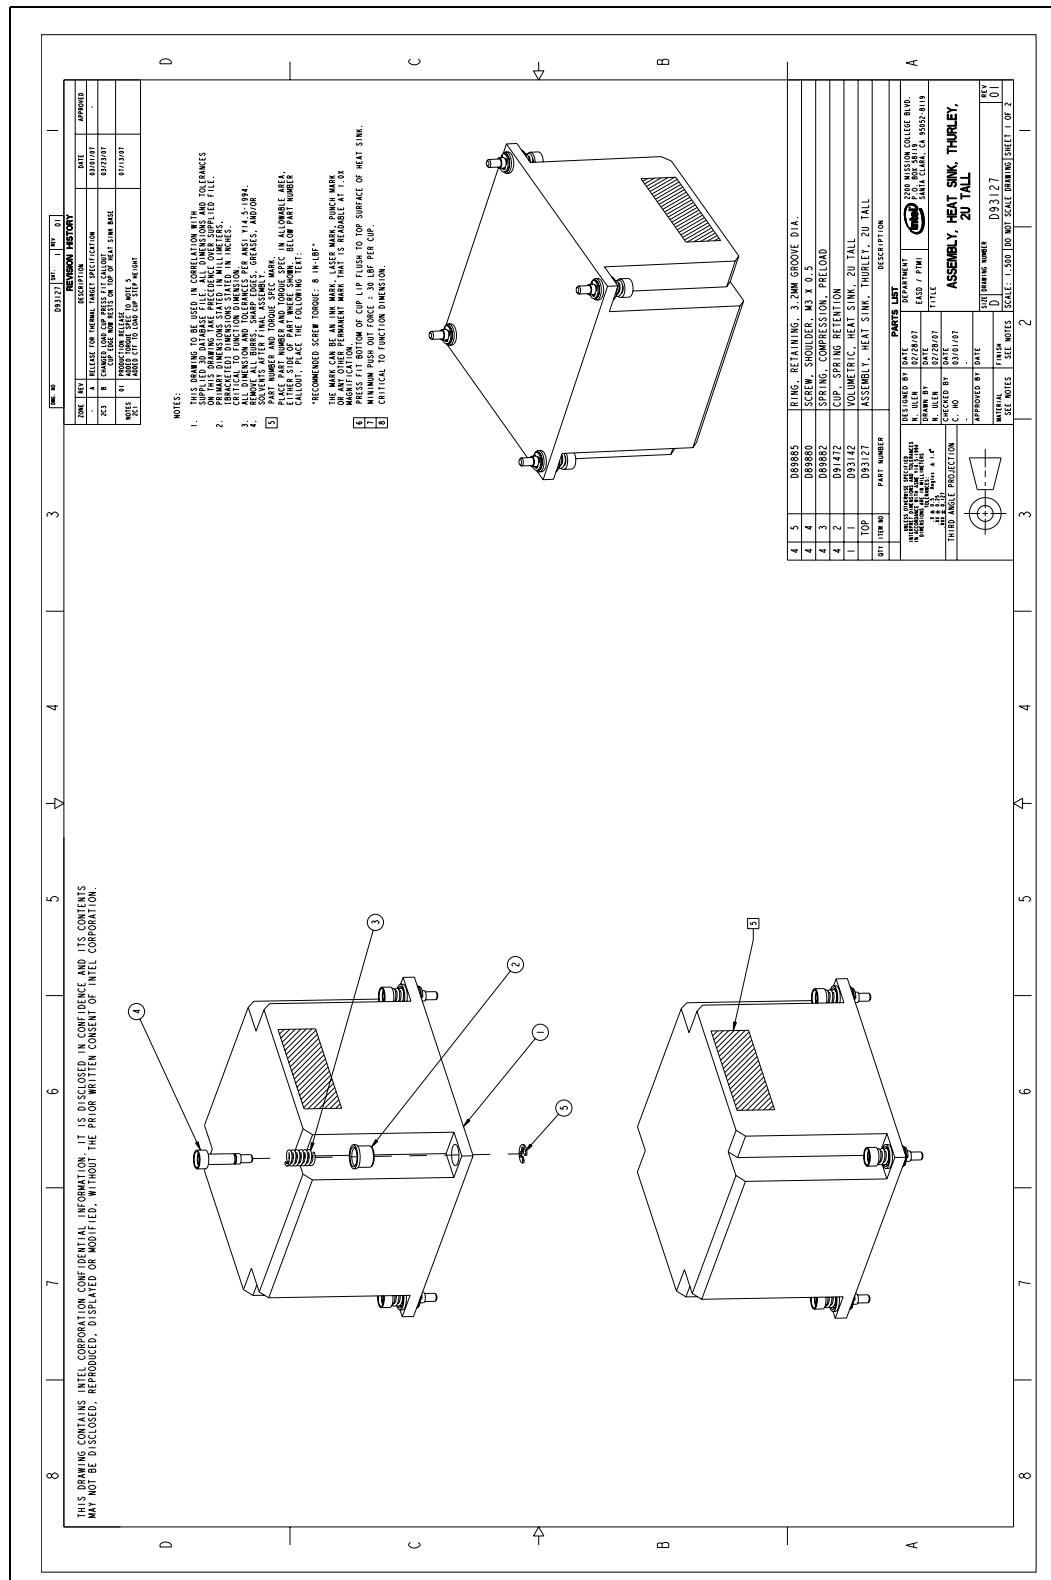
2U Collaborative Heatsink Assembly (Sheet 2 of 2)
